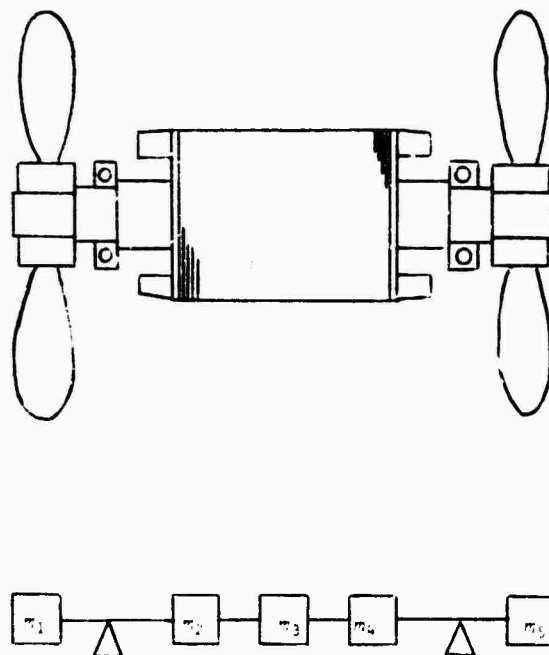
Shaft and rotor assembly with two shaft mounted impellers.
